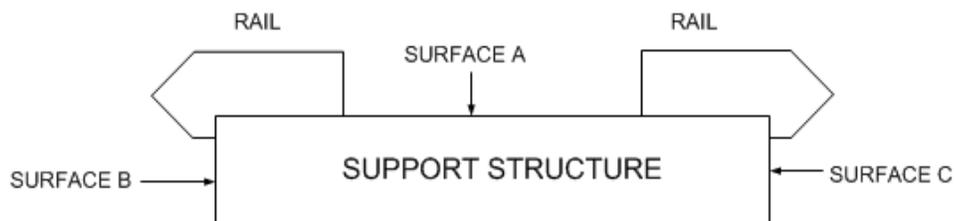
The accuracy of v-roller rails is largely dependent on the flatness, straightness and parallelism of the surfaces to which they mount.
